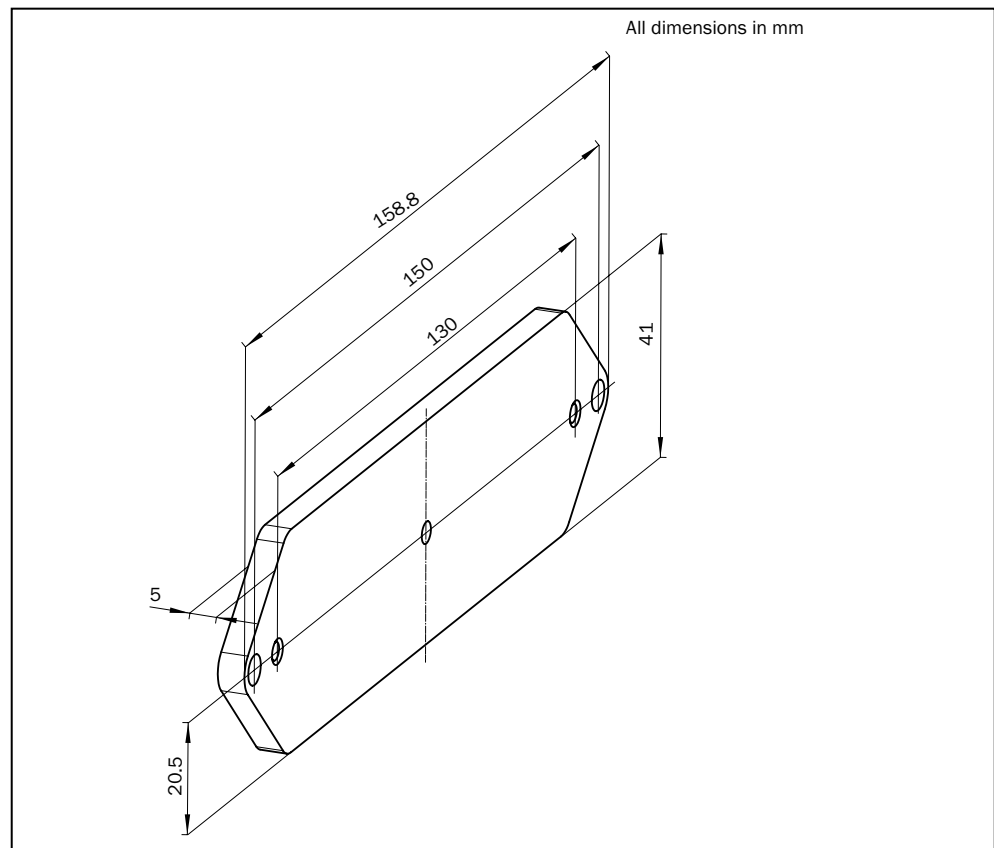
Dimensional drawing mounting kit 3 (part no. 2039303)
